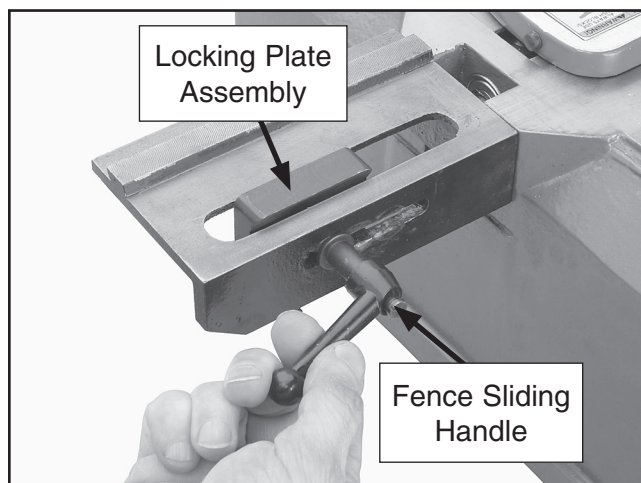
Securing the locking plate assembly with the fence sliding handle.
